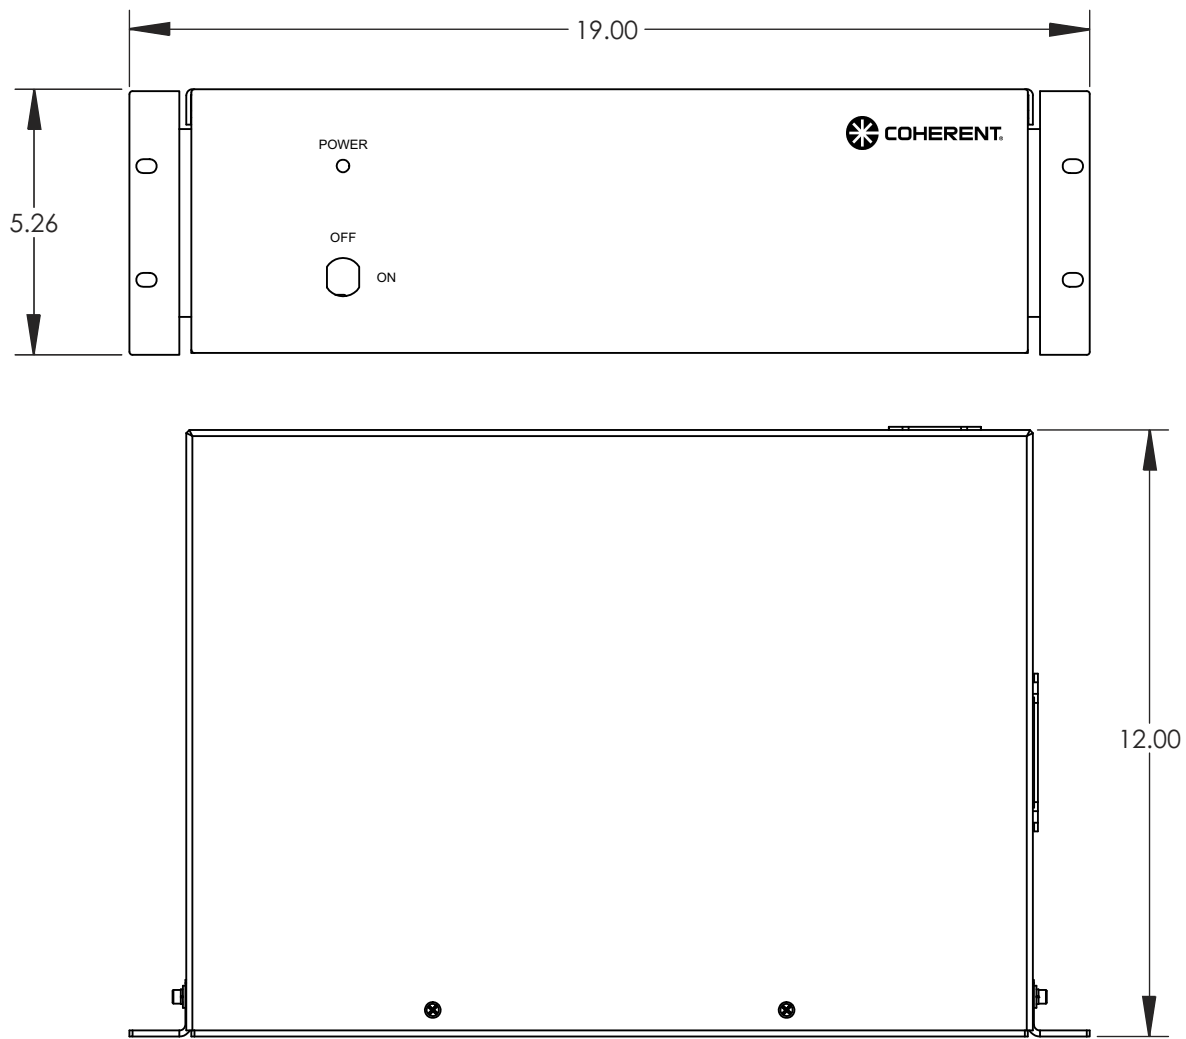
Vitara-T & Vitara-S Seed Laser Controller Dimensions
